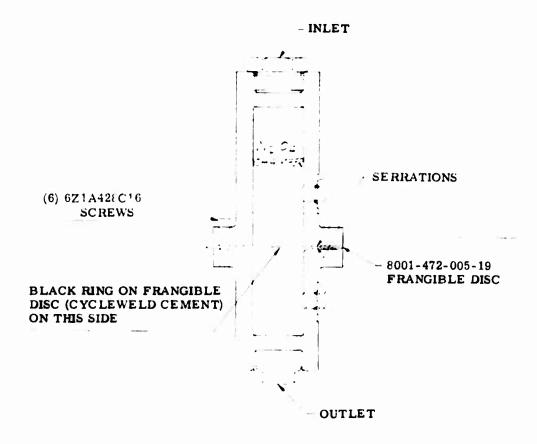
Storage Fixture - Aluminum Frangible Disc Exposed to ${\rm N_2O_4}$
